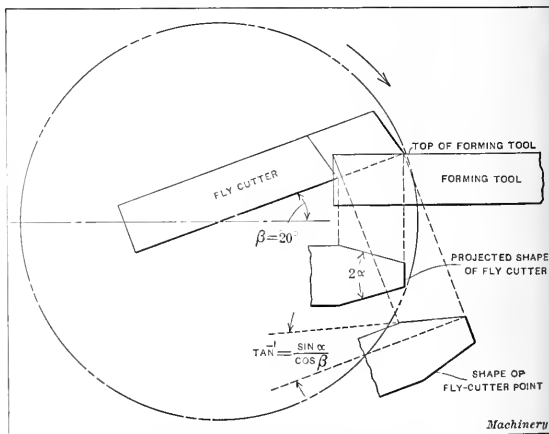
Method of setting Fly Cutter to obtain the Required Clearance on the Forming Tool
